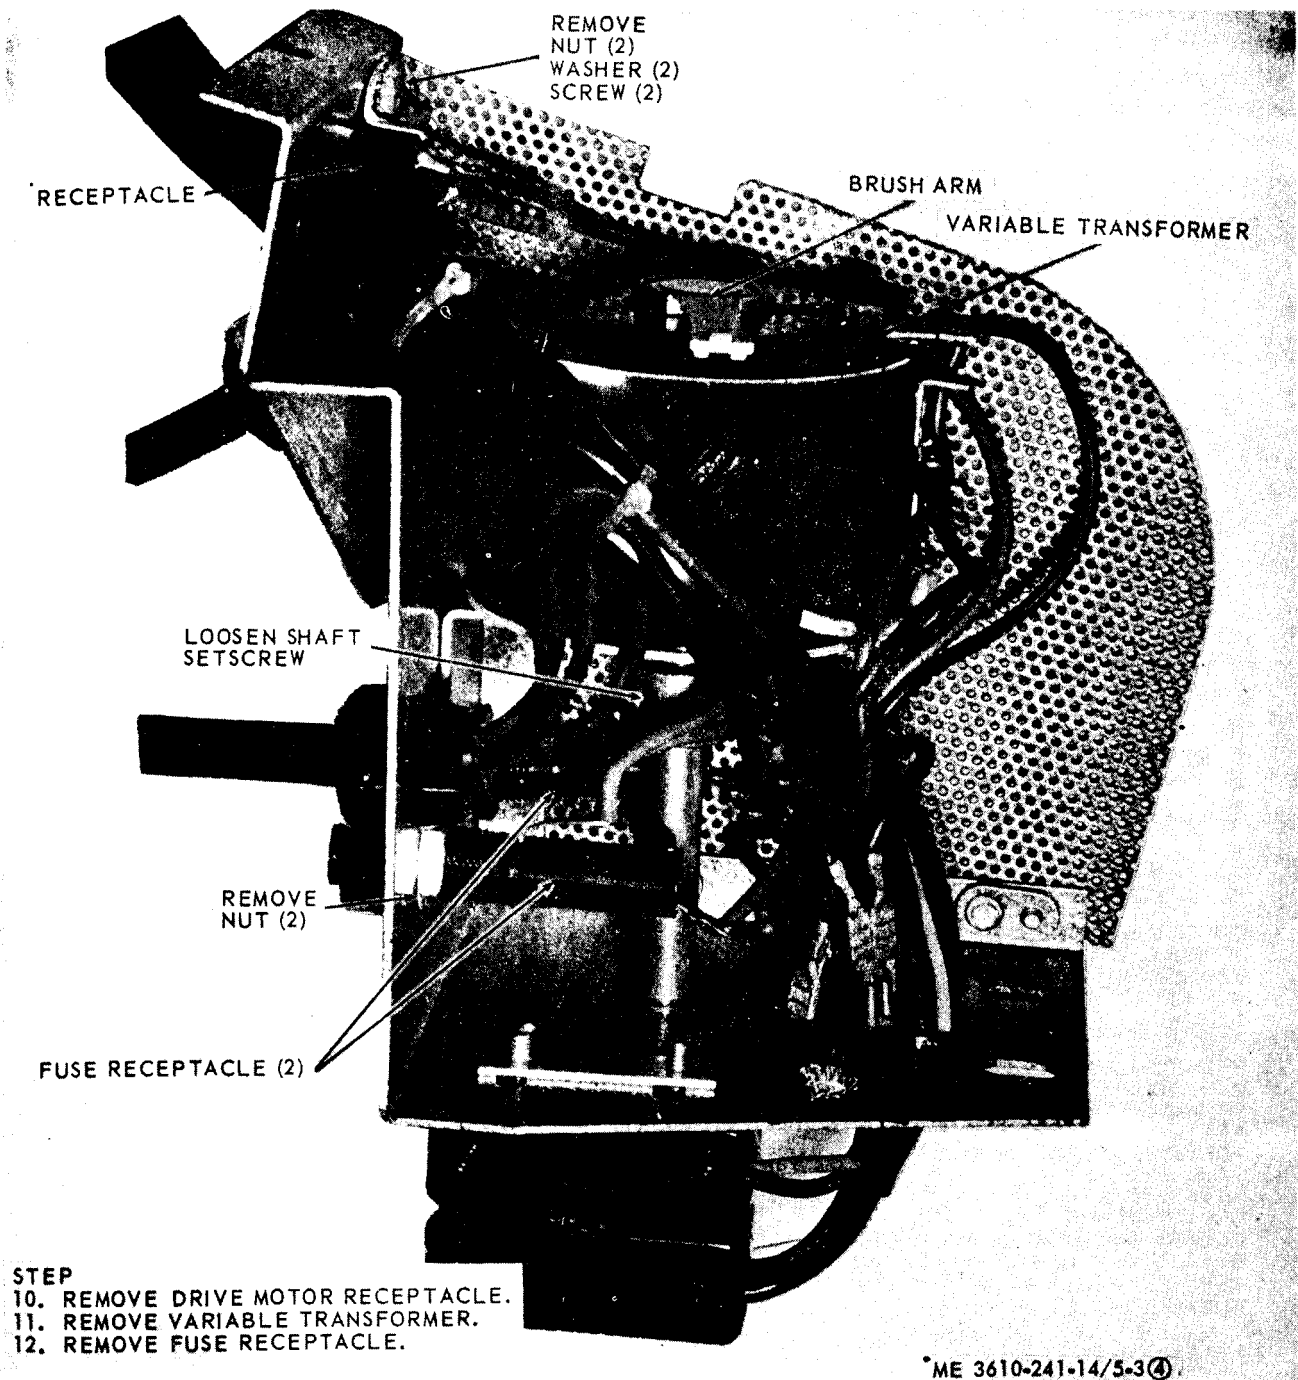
Speed control assembly removal and installation. (sheet 4 of 4).
